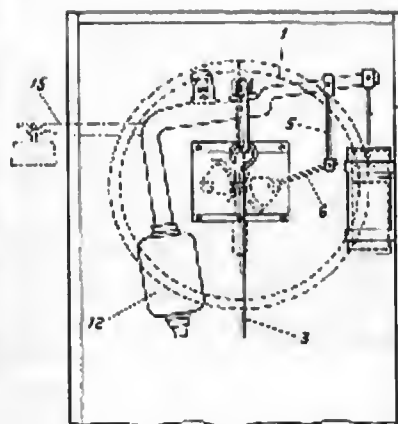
▲▲ Princessa mechanism finally built in 1943.
